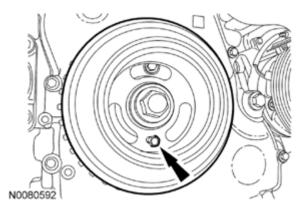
Locating CKP Sensor And Bolts Courtesy of FORD MOTOR CO.
